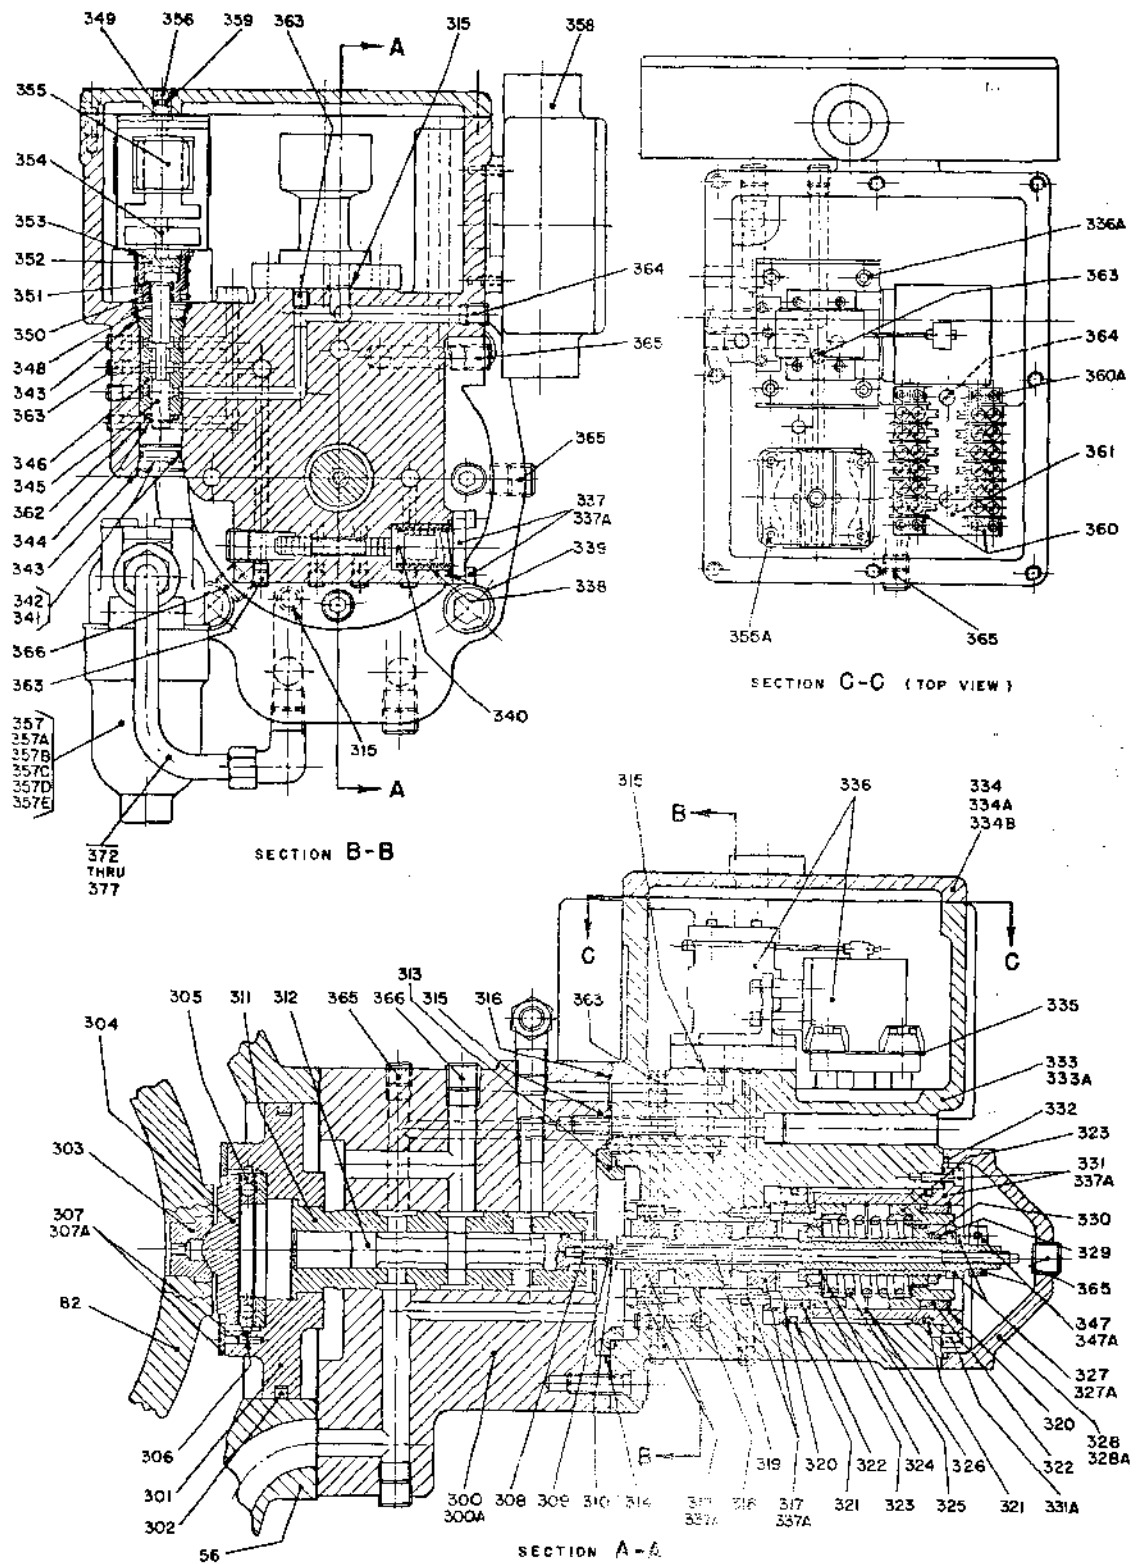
Type "DV" Pumps (Sizes 4-35) Control Parts Drawing (50064-A, (6S-947740-A, sh.#2)
